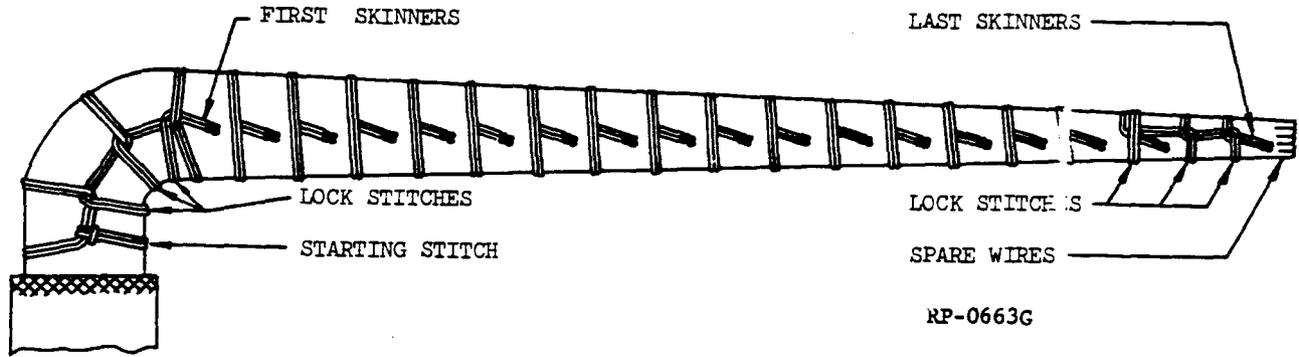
SEVERAL CABLES IN RECTANGULAR FORMATION FORMED OUT AS A SINGLE ROUND CABLE ARM (PARS. 2.31, 3.22)
